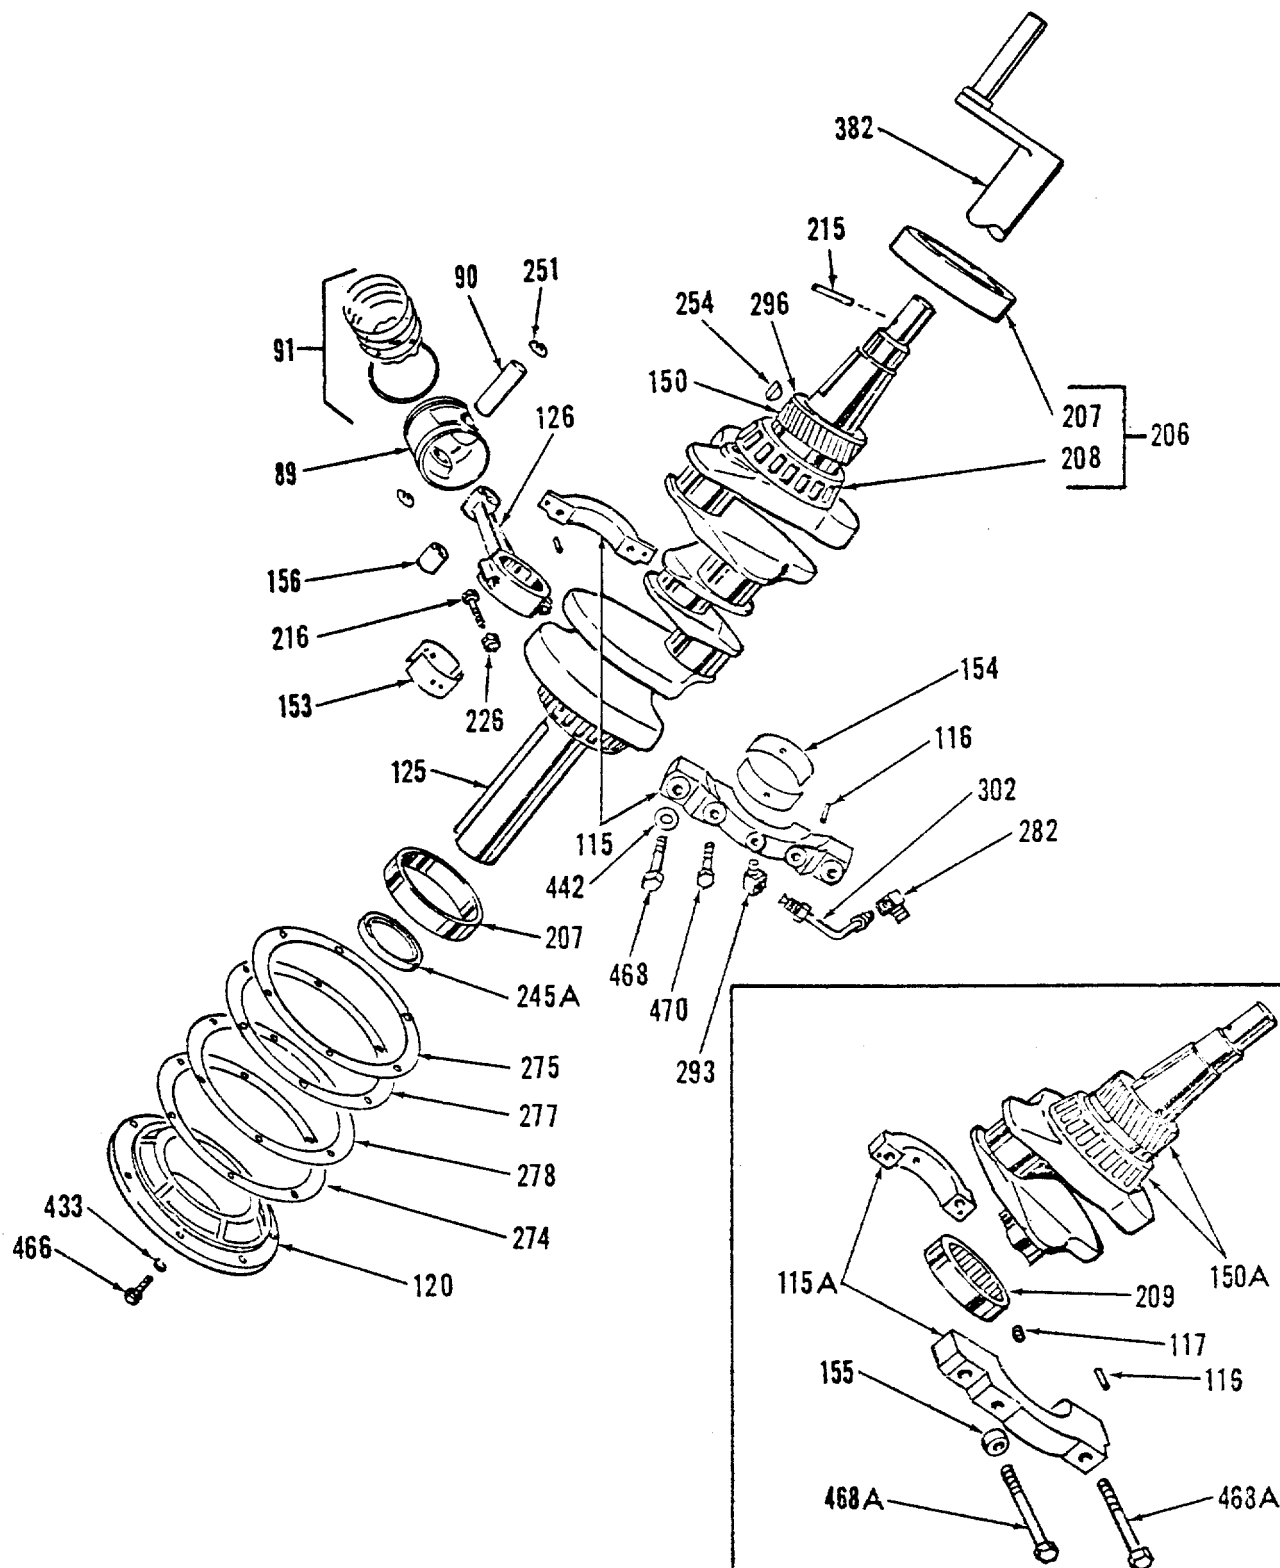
CRANKSHAFT, PISTON AND CONNECTING ROD GROUP
